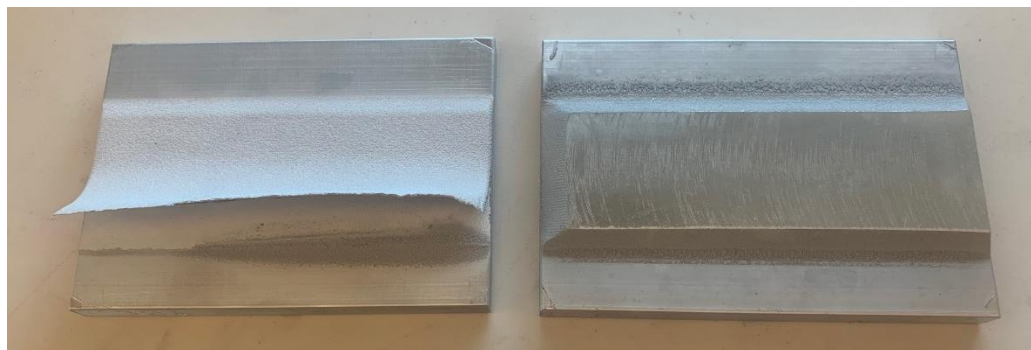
Delaminated tensile block (left) and laminated tensile block after surface machining (right).
